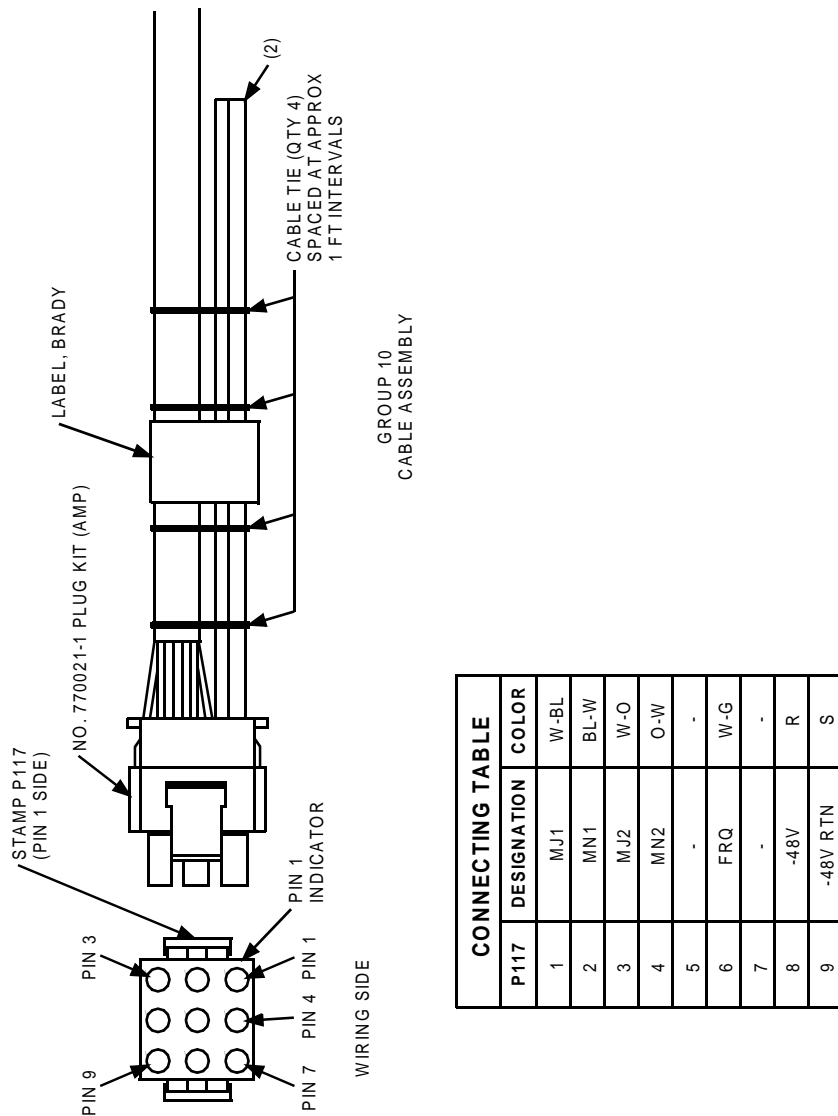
ED-7C723-35, Group 10 Cable Assembly
